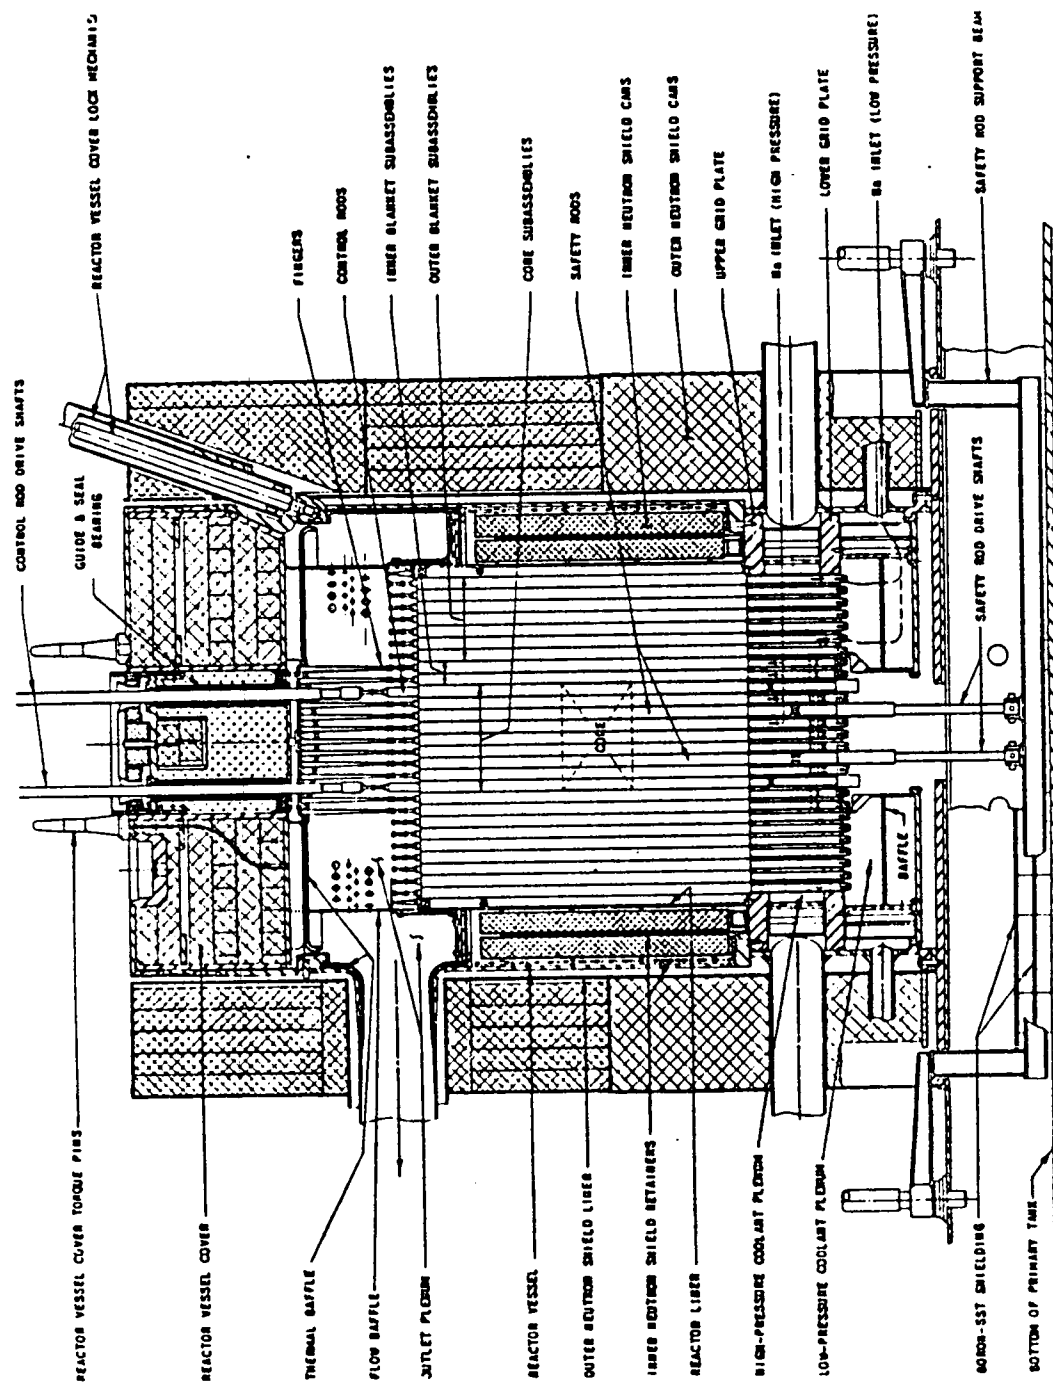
EBR-II Reactor Vessel Assembly.
